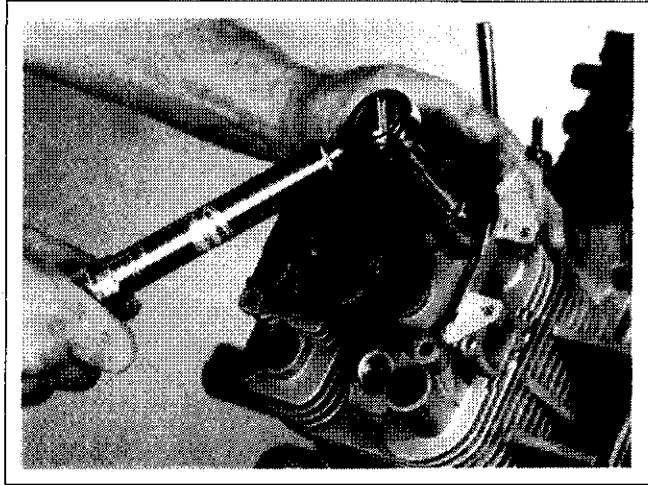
Tighten Cylinder Head Fasteners in Sequence and to Torque Specified.
